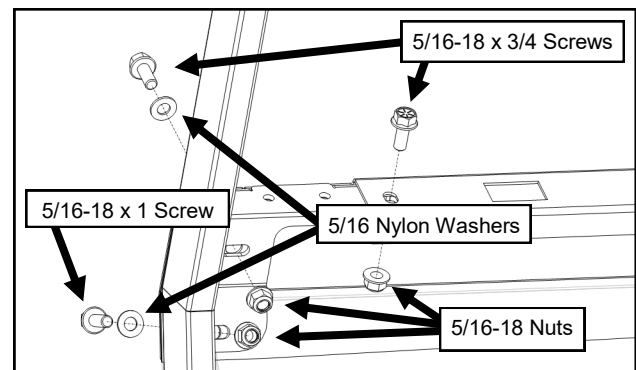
(Cross Brace to Side Frame Fasteners)
